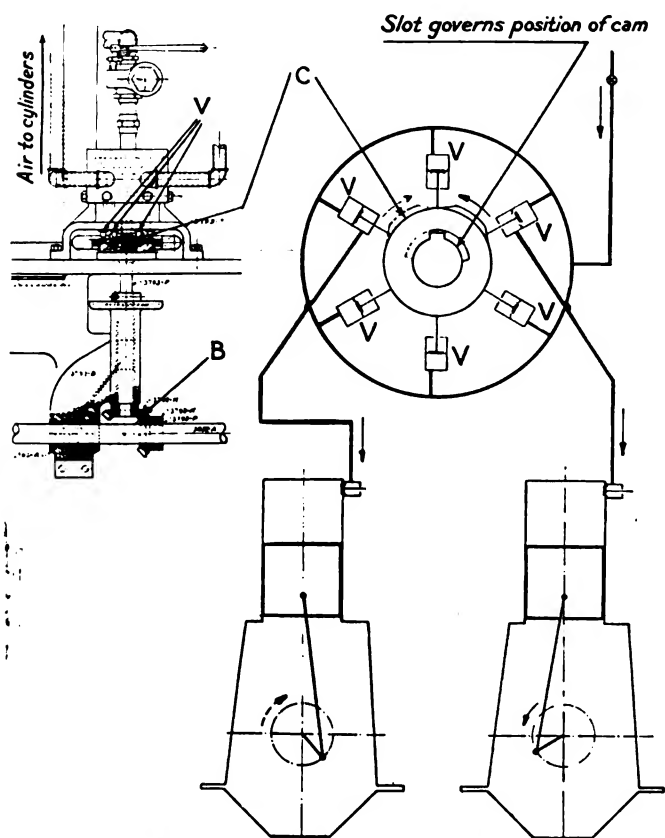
Diagram indicating air starting mechanism, its operation and detail of distributor cam
